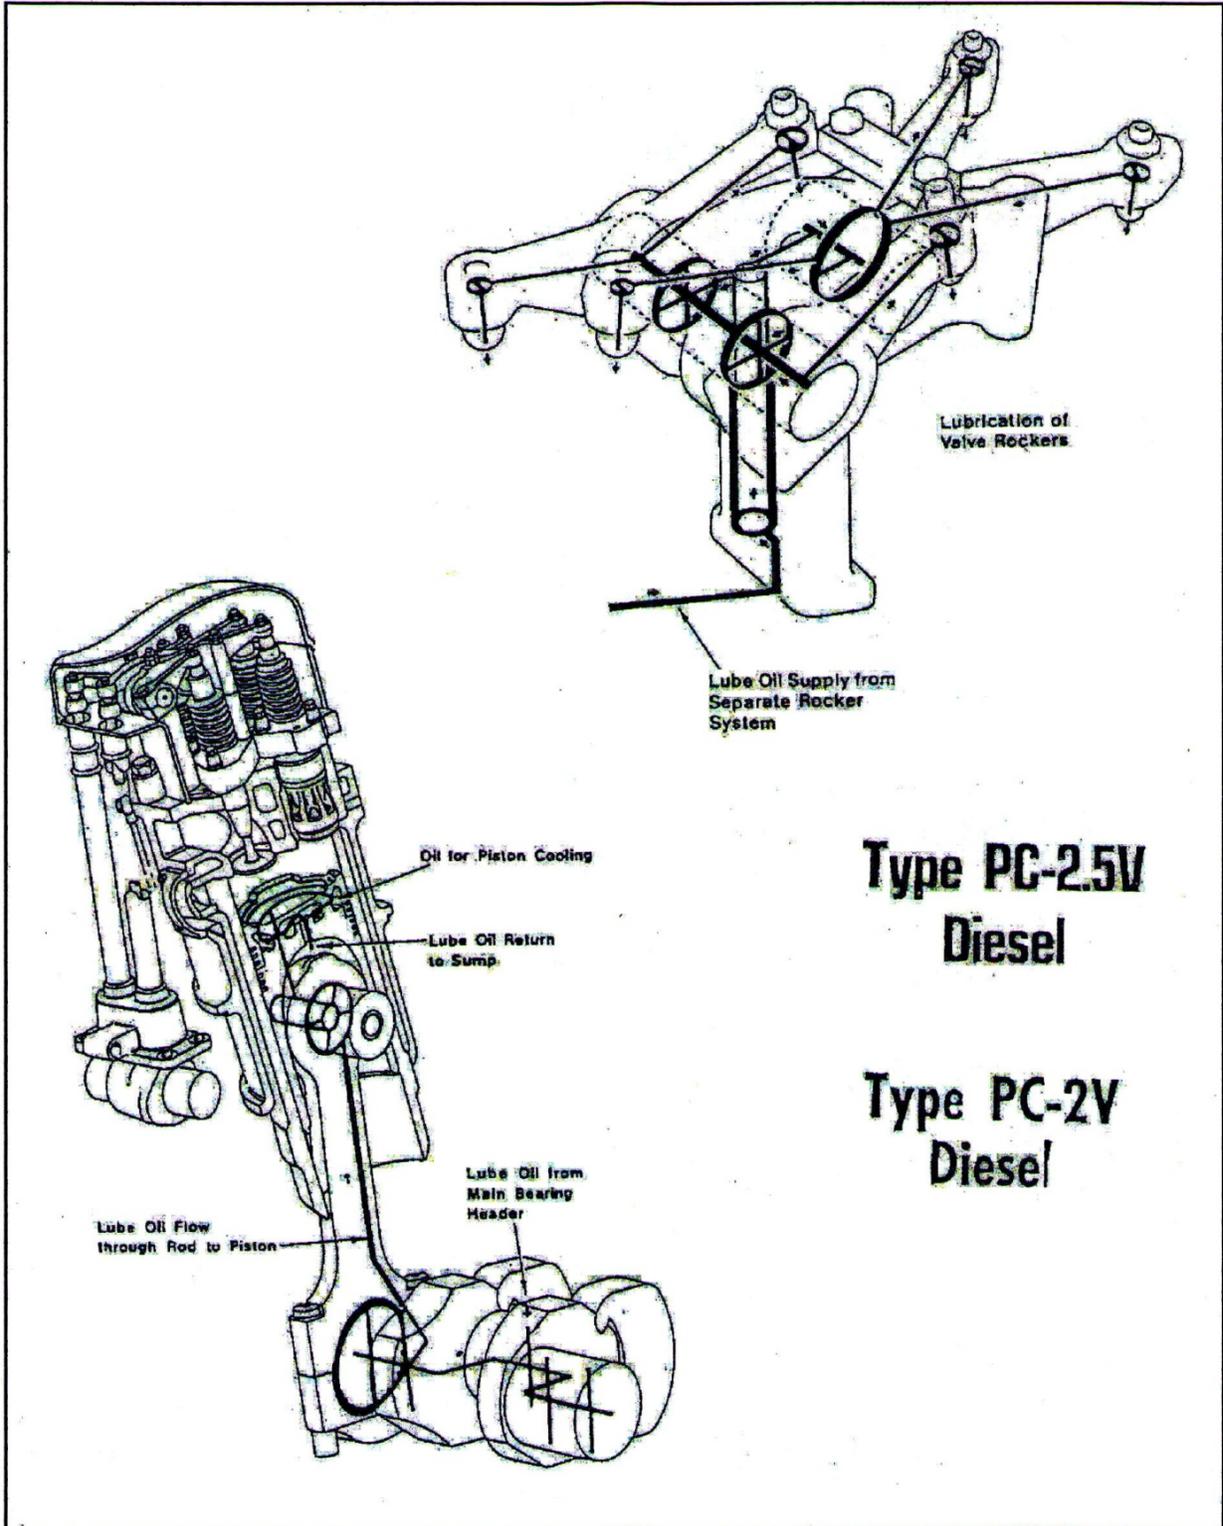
Lube Oil Distribution – Bearings, Rocker Arm, Piston Cooling
